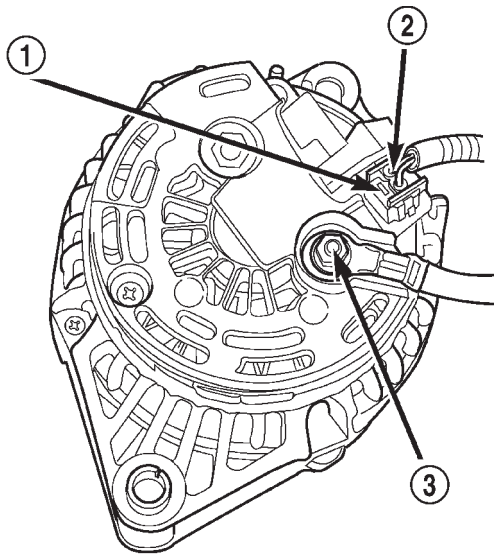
Remove/Install Generator—4.7L V-8 Engine
